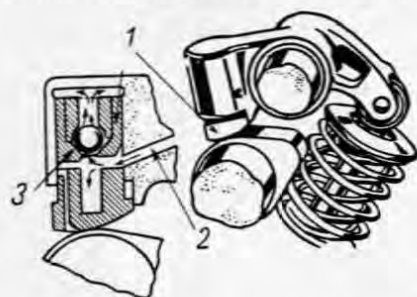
Hydraulic tappet in the rocker of an aircraft engine.
